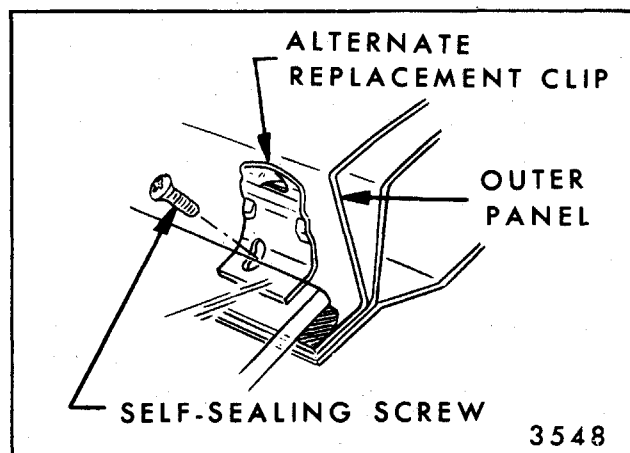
Reveal Molding Clip Alternate Replacement
